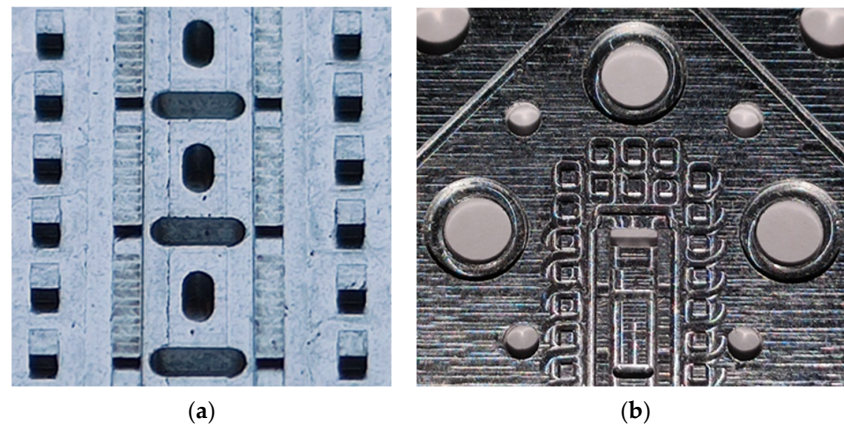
Detailed view of the manufactured single-periodic prototype. (a) Zoom of the central waveguide with stadium-shaped holes in T position and (b) zoom of the stepped right-angled bend transition to WR-10.
